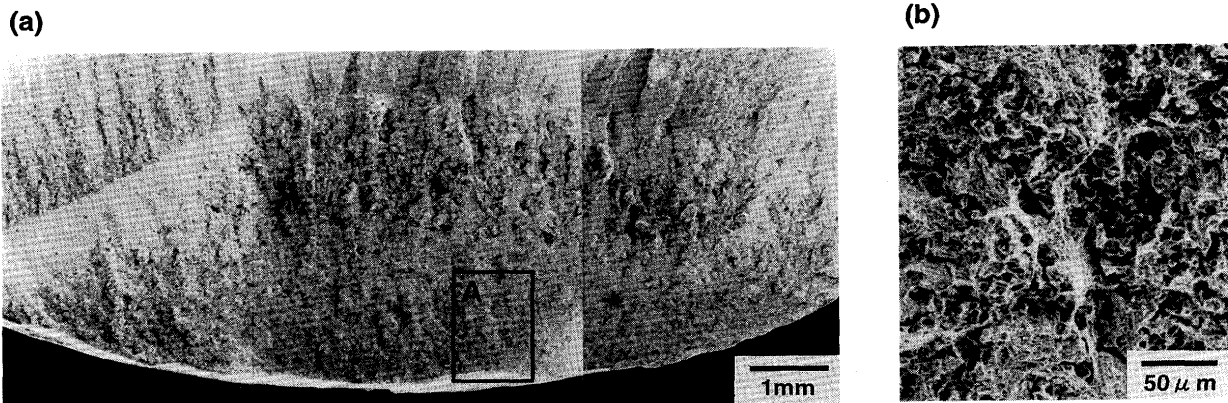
Scanning electron micrographs of fracture surface of bolt.
